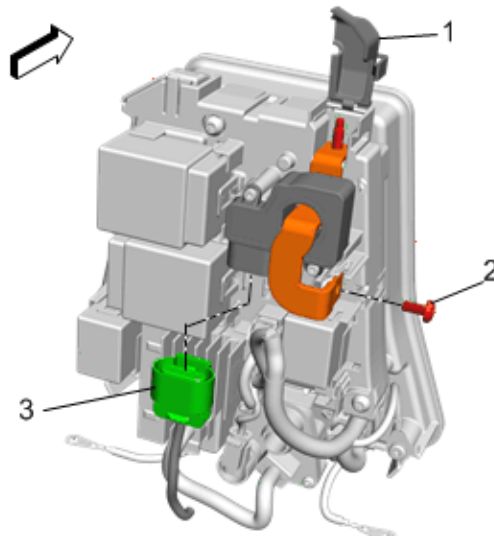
Terminal Cover, Fastener And Battery Current Sensor Connector
